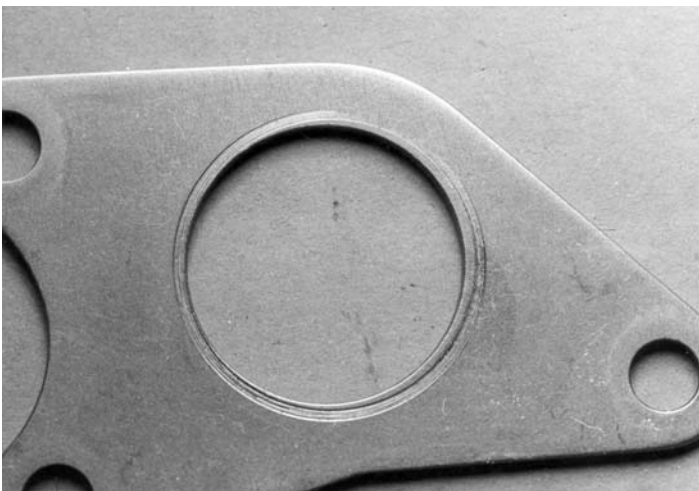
Inner side of the retaining plate showing extensive grooving
